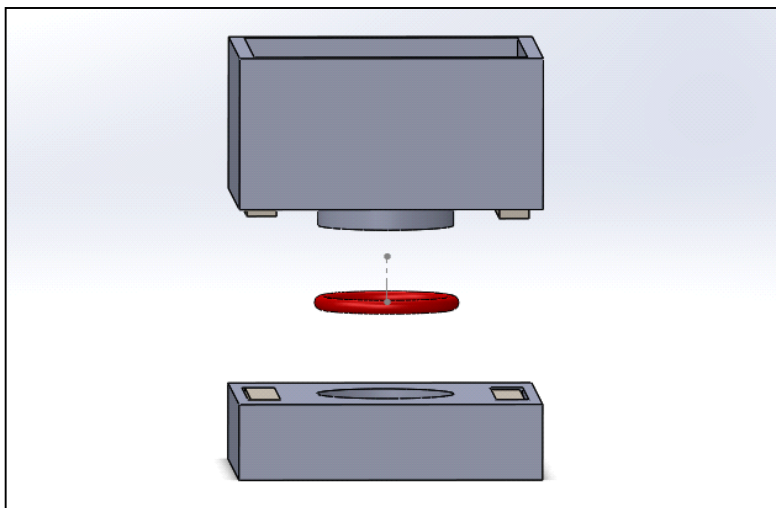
Exploded view of LCI's Chamlide CMB commercially available. Quorum Technologies 2014)
